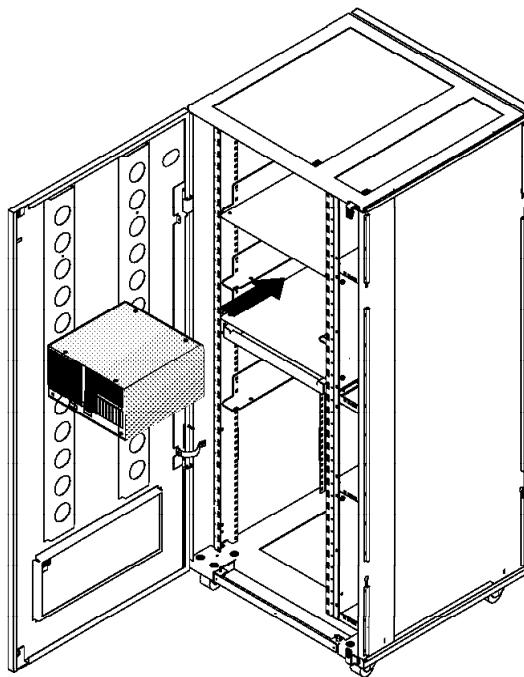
Installing the NNP-B Unit in the rack (Rear Side)
